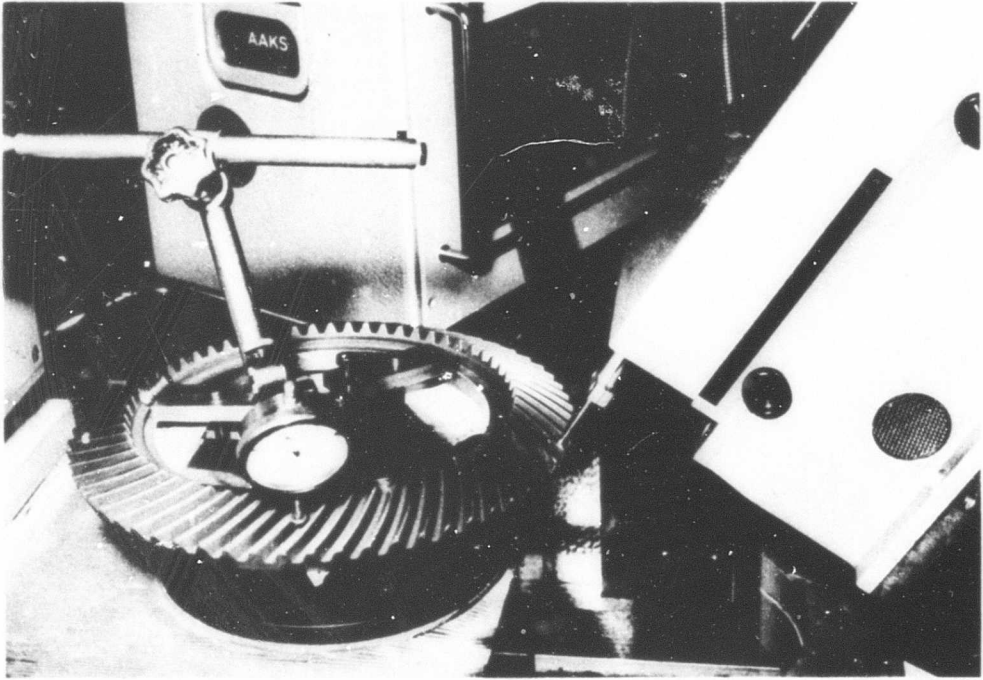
Measurement of Runout on the Input Stage Spiral Bevel Gear Performed by the Hofler Gear Measuring Machine.
